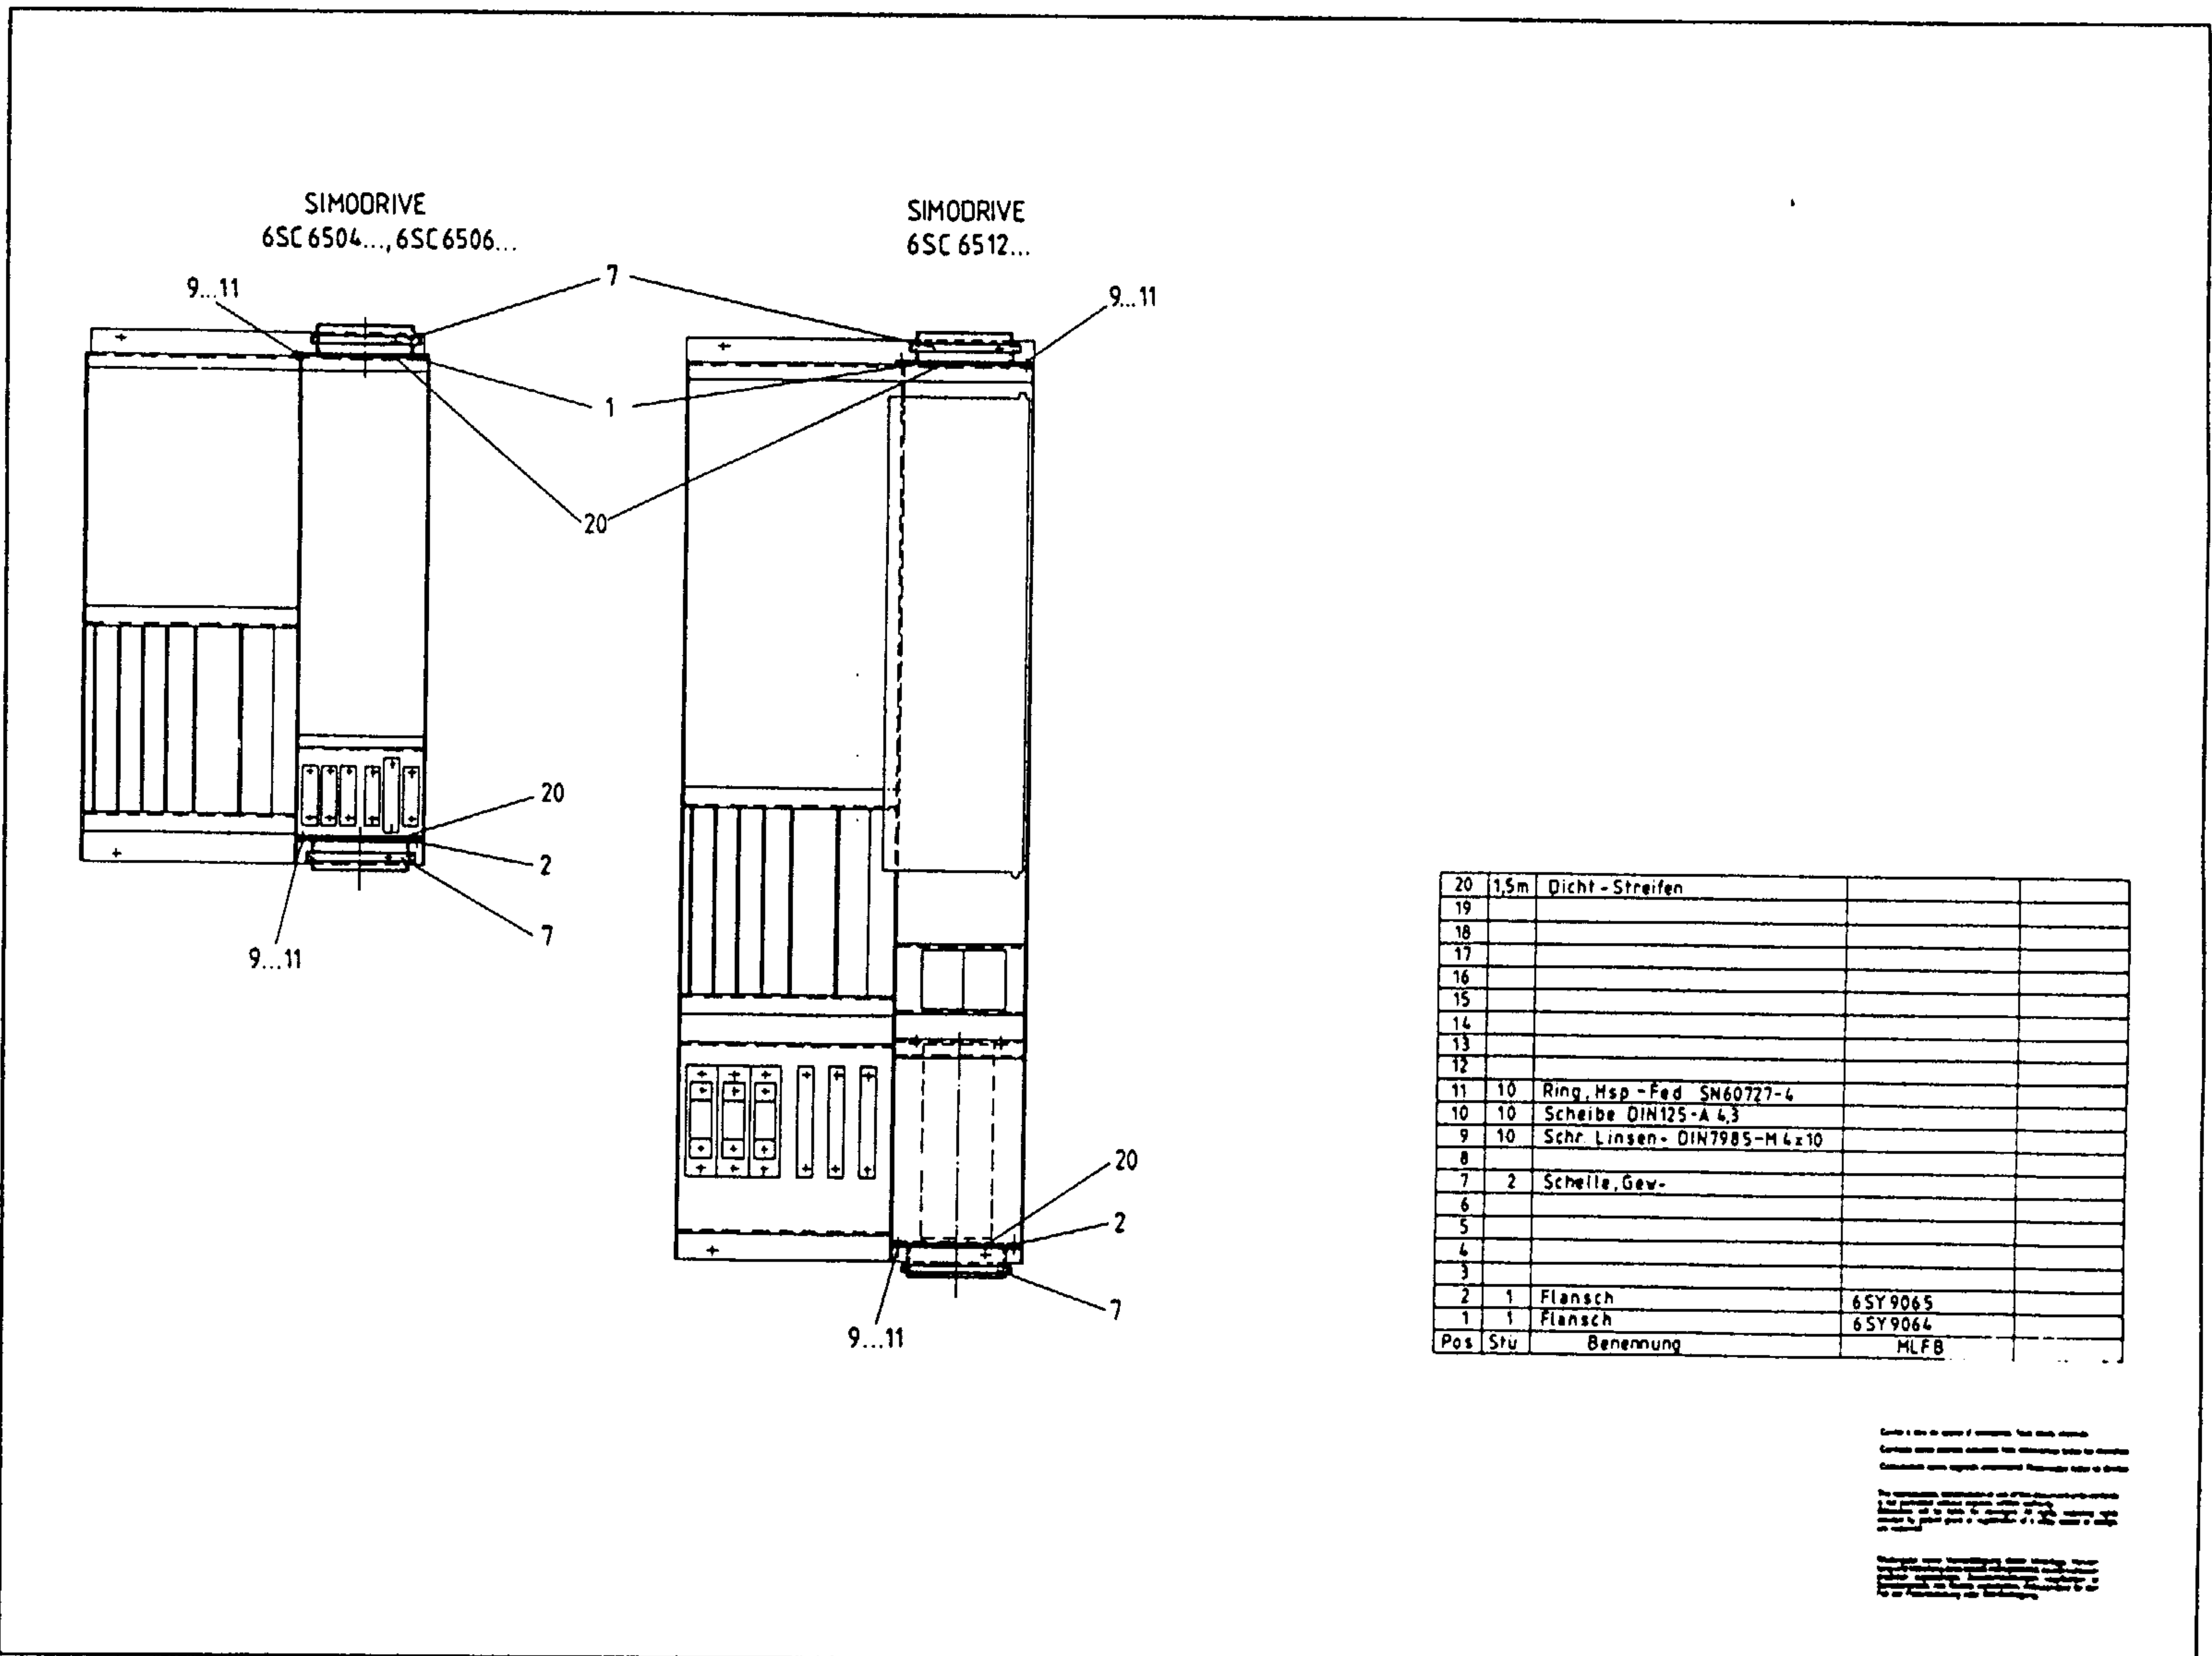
Dimension sheet for external heat dissipation connecting flange, option E55 (6SC6508)
